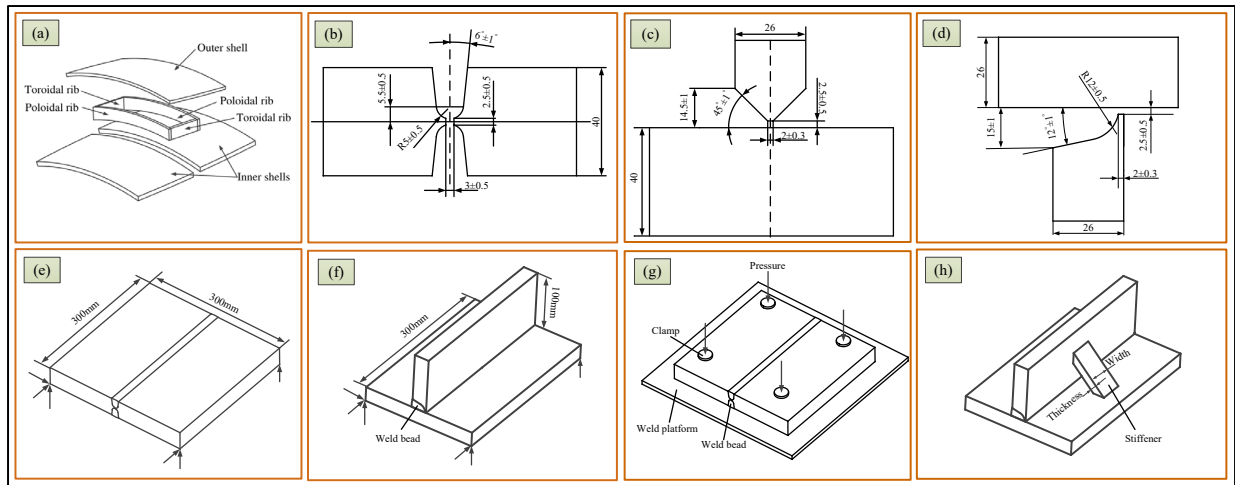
Double shell structure and different welded joint: (a) Double shell structure, (b) X groove butt joint, (c) K groove T-joint, (d) J groove T-joint, (e) Unconstrained butt joint, (f) Unconstrained T-joint, (g) Restraint conditions of butt joint, (h) Restraint conditions of T-joint.
